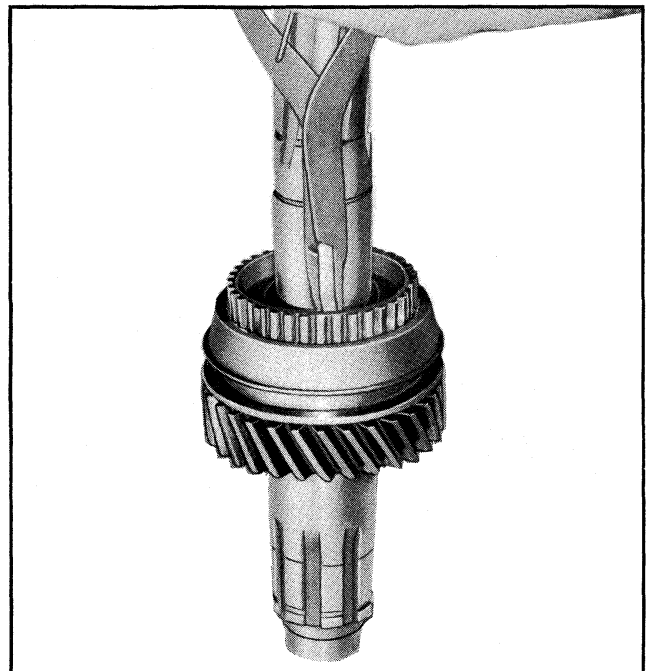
A-23 Removing 1-2 Speed Synchronizer Clutch Assy. Retainer Snap Ring
